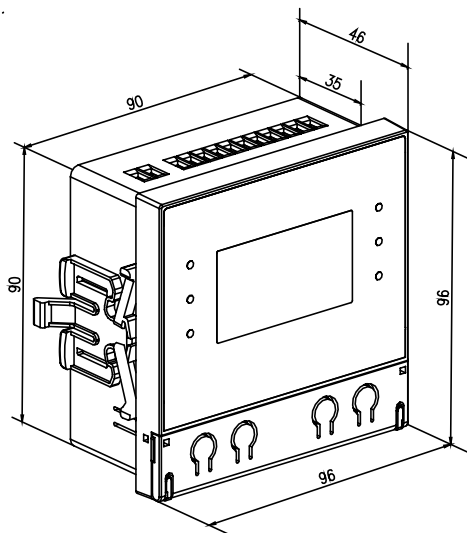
ALP220-EF External Dimensions (Unit: Mm)
